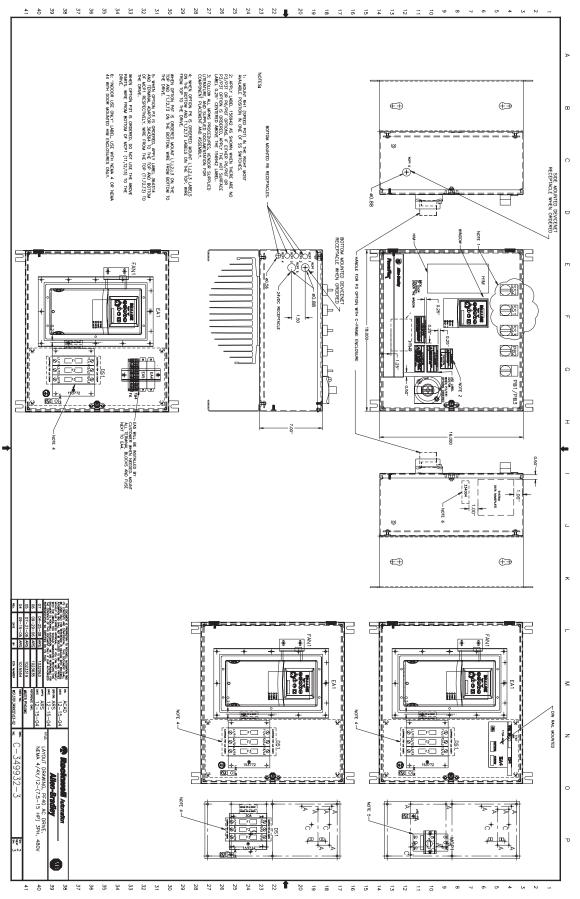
PowerFlex 40 Frame C Layout Drawing
